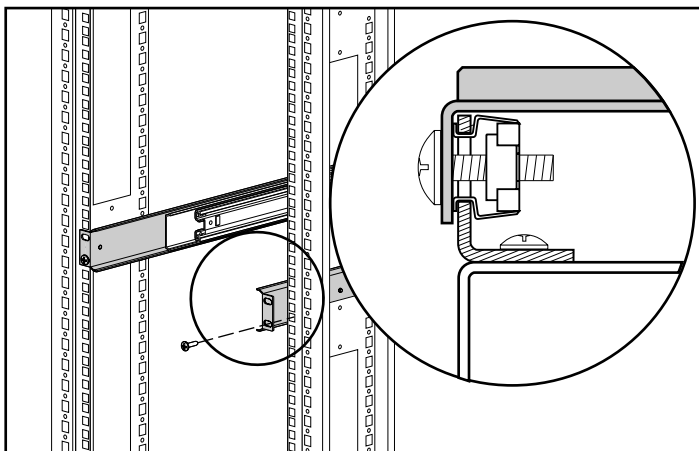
Installing the cage nut on the back of mounting bracket assembly with top view shown in inset
